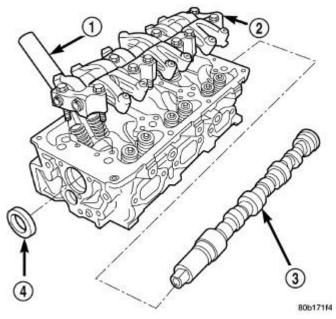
Cylinder Head, Camshaft, and Rocker Arms Courtesy of CHRYSLER LLC
